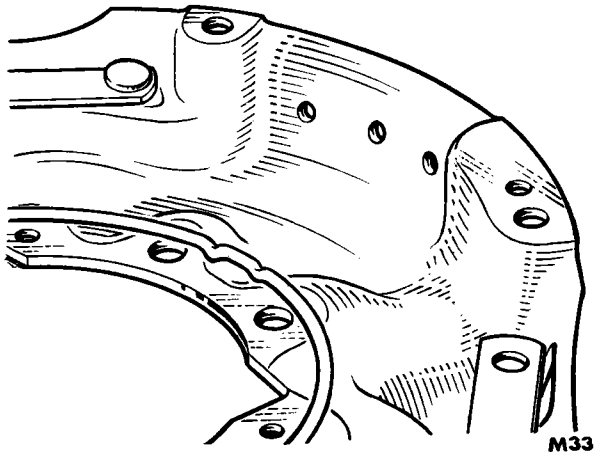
Assembly of cover pressing and fulcrum ring
